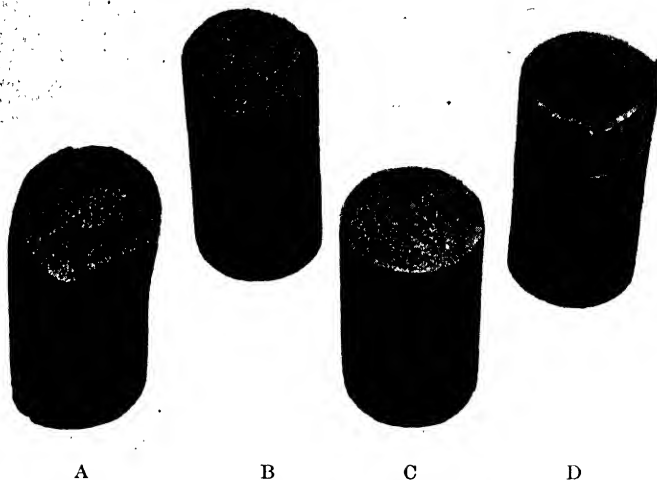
PLATE VIII. FRACTURED TEST BARS OF STEEL TO BSS. 2.S.14 SHOWING STAGES OF CASE-HARDENING
